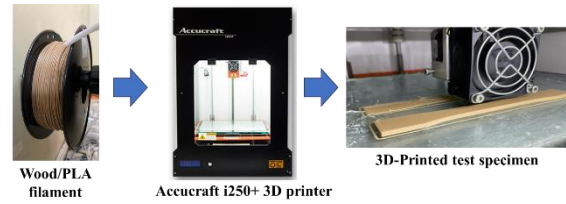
Fabrication of a test specimen using the Accucraft i250+ 3D printer
